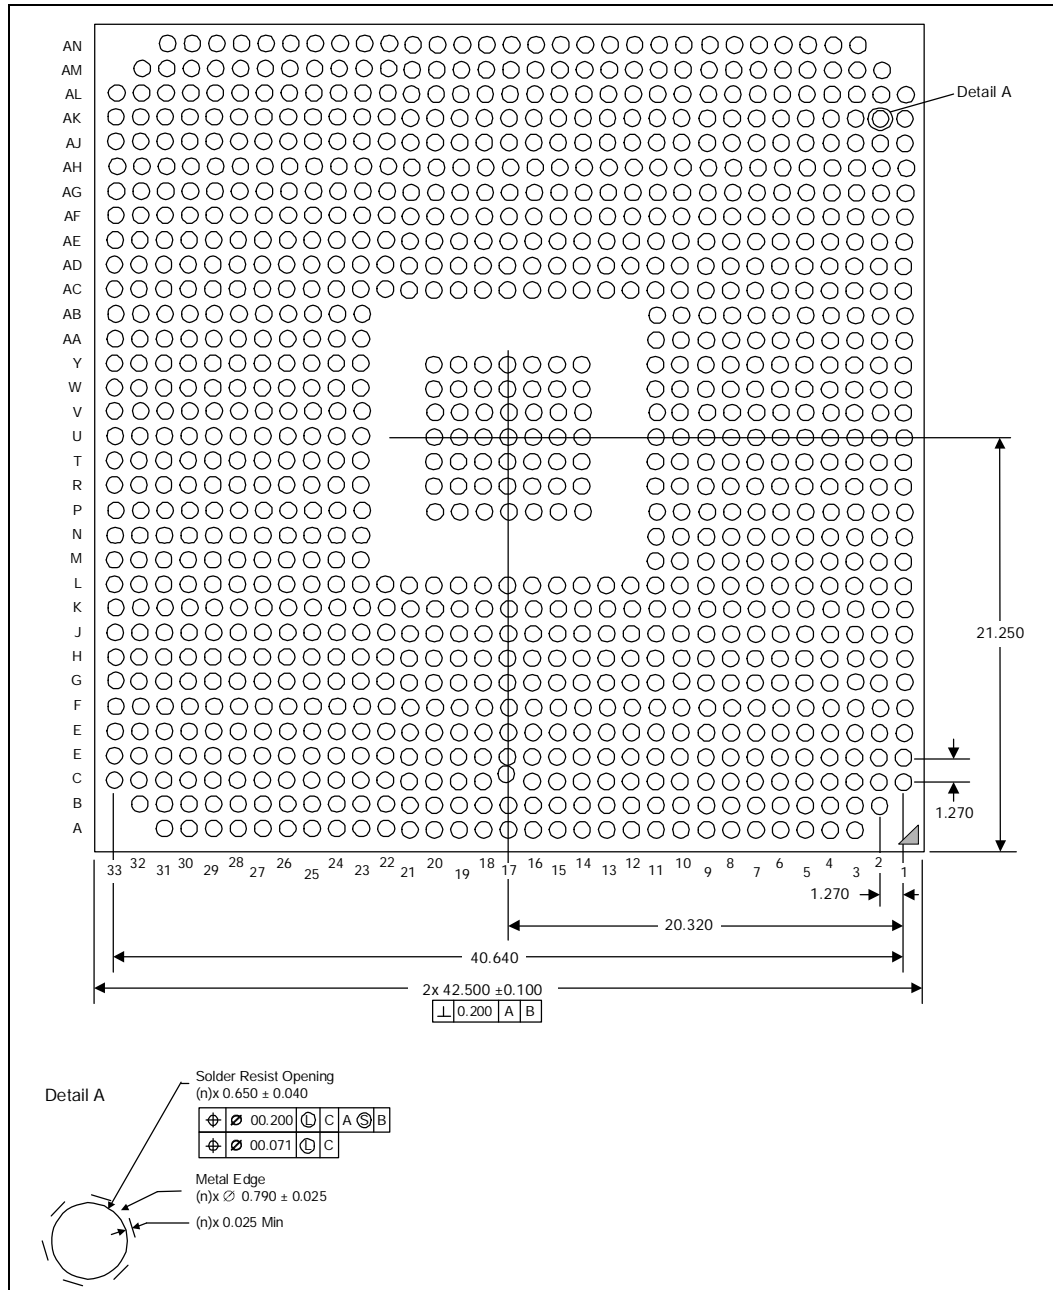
Intel® 82875P MCH Package Dimensions (Bottom View)
